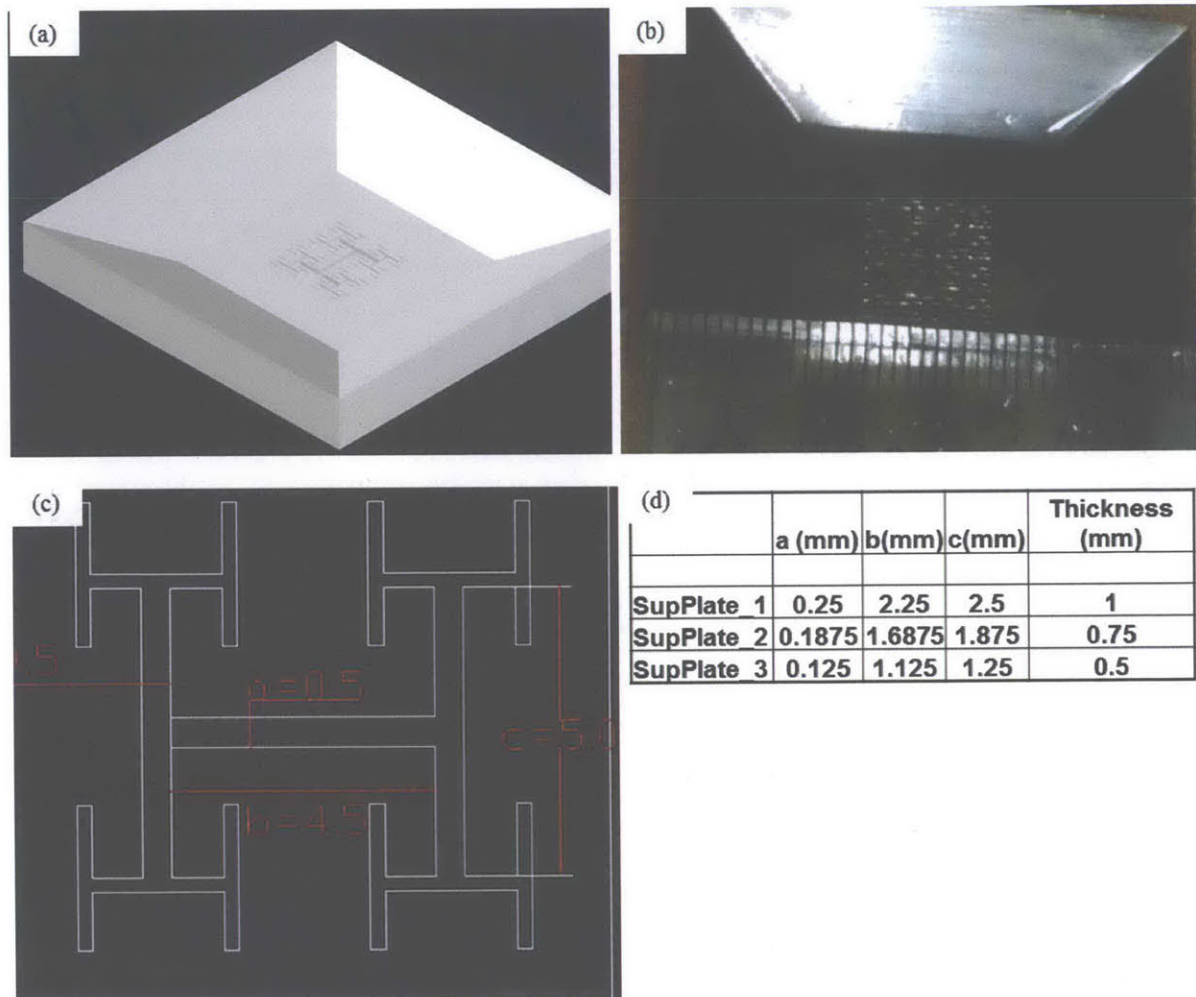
3D drawing of H tree based sample for SAM measurement tapered platform (a) Fabricated samples using 3D printer (Project 6000) (b) detailed dimension schematics of the H tree (c) and samples dimension (d)
